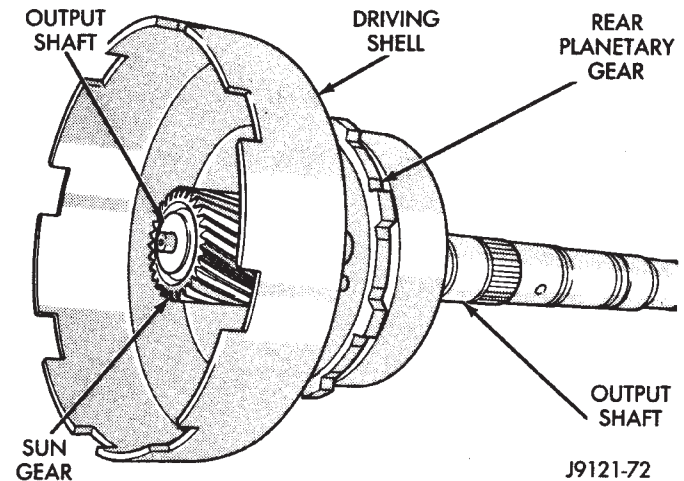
Installing Sun Gear And Driving Shell (46RH)
